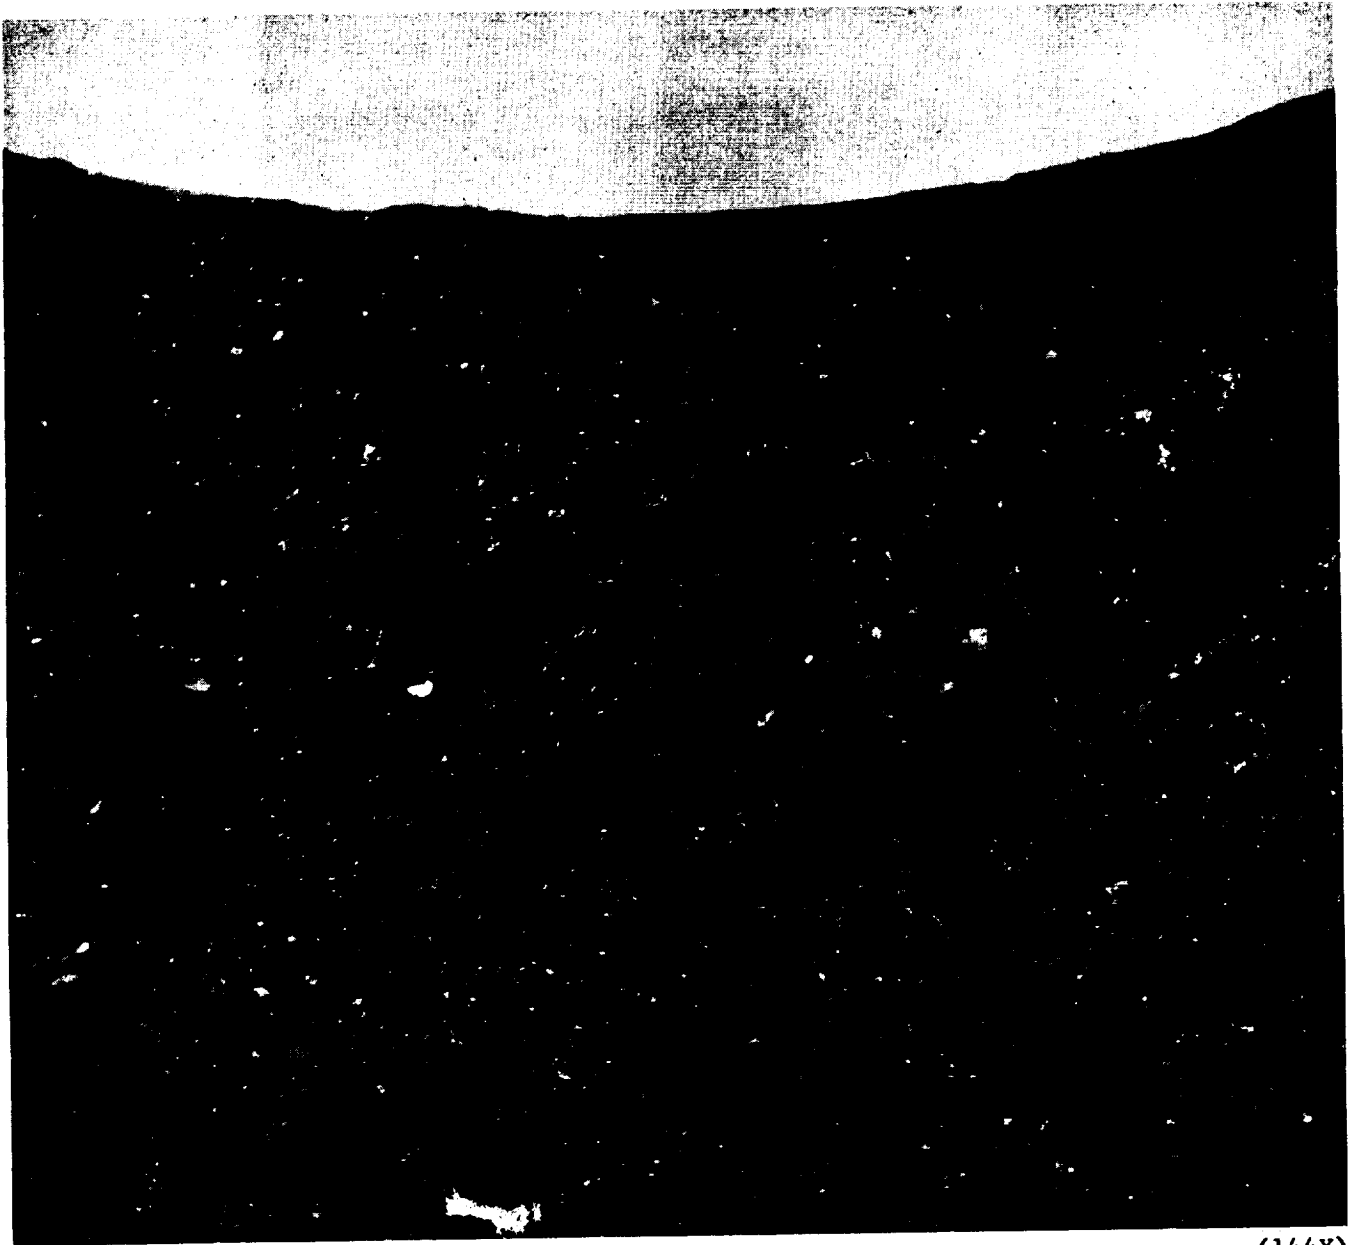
BREAK-OUT (SPALLING) OF EXIT SIDE OF
